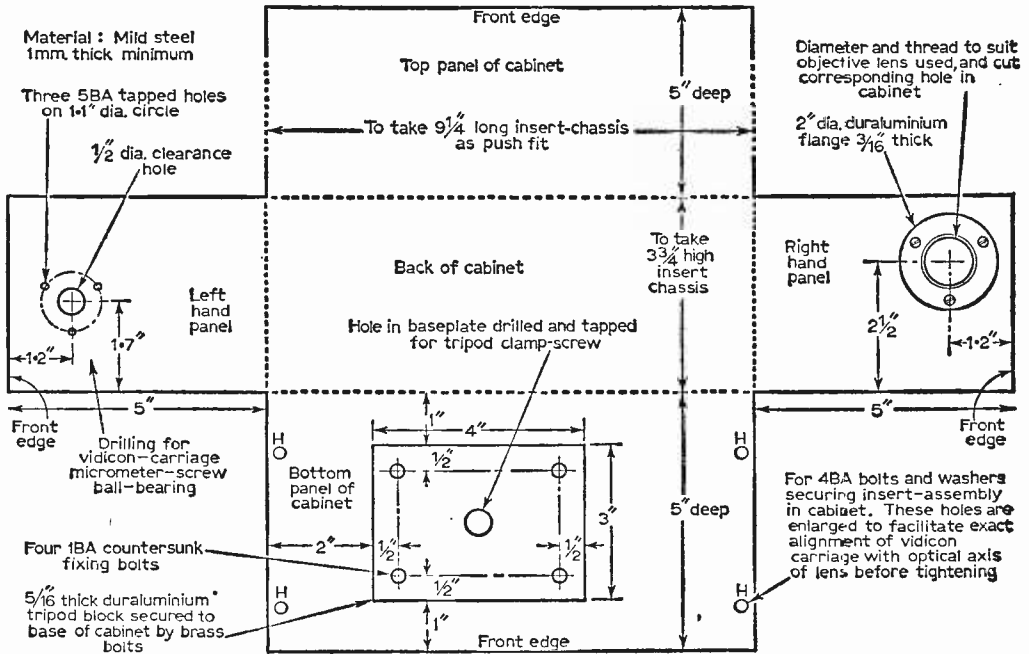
Mechanical details of the mild steel plate cabinet, lens flange and fitting for vidicon carriage micrometer adjustment.
